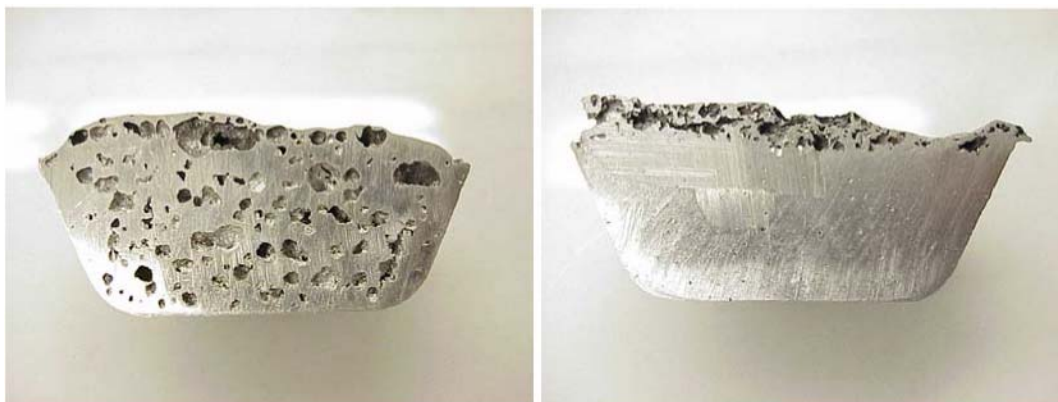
Cross sections of aluminum (l) and magnesium (r) castings with high hydrogen content, solidified under reduced pressure.
